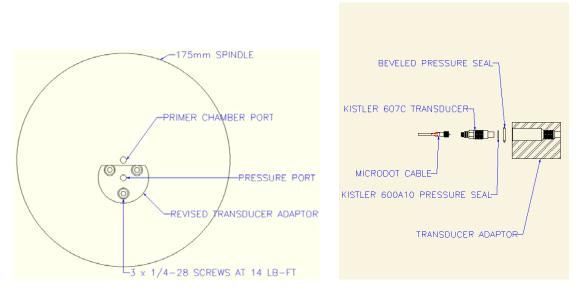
General arrangement of transducer adaptor, pressure seals, and transducer for measuring rear pressure in 175mm cannon. Not shown are the two ½-28 socket head cap screws hand tightened to assemble the adaptor to the spindle.
